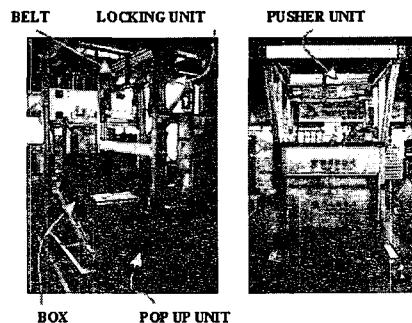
Manufactured transfer loading system for 21" RF band assembly box
